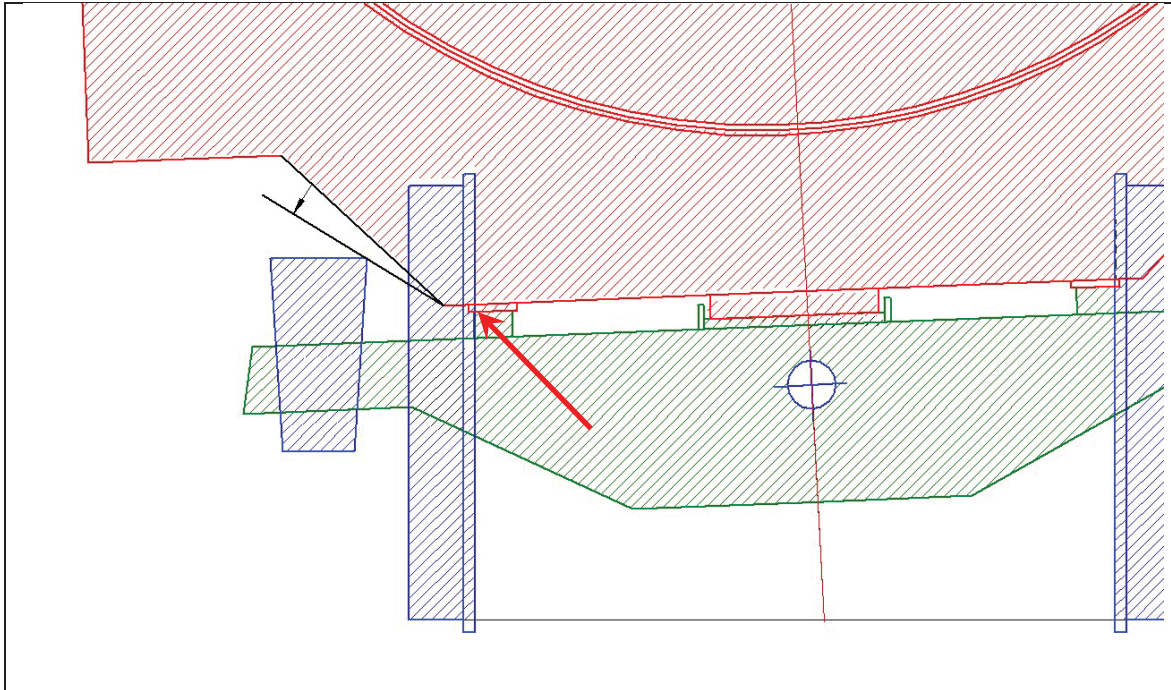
Car body rolls about the side bearing until contacting the side frame.
